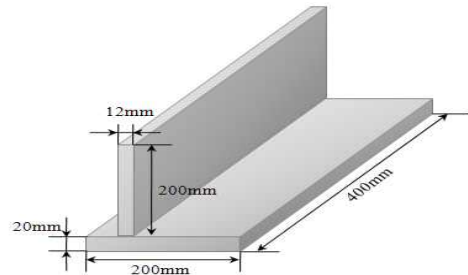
Geometry of specimen for fillet weld(20t-12t)
